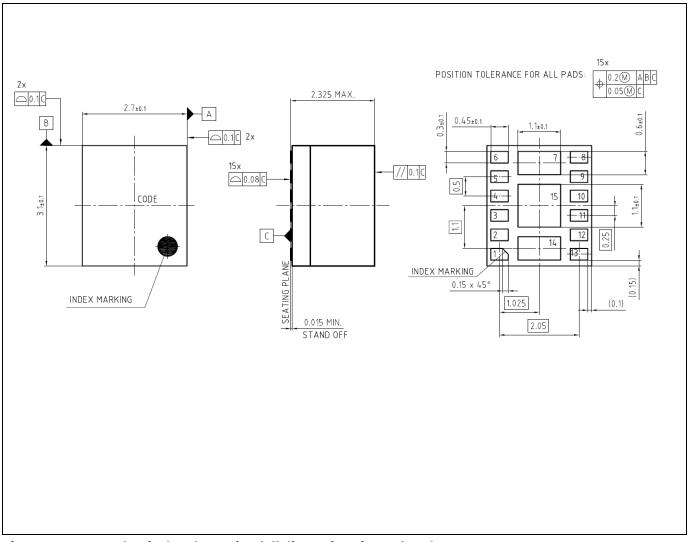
Mechanical Pad Drawing (all dimensions in mm), Tolerances are as per ISO 2768-mK.
